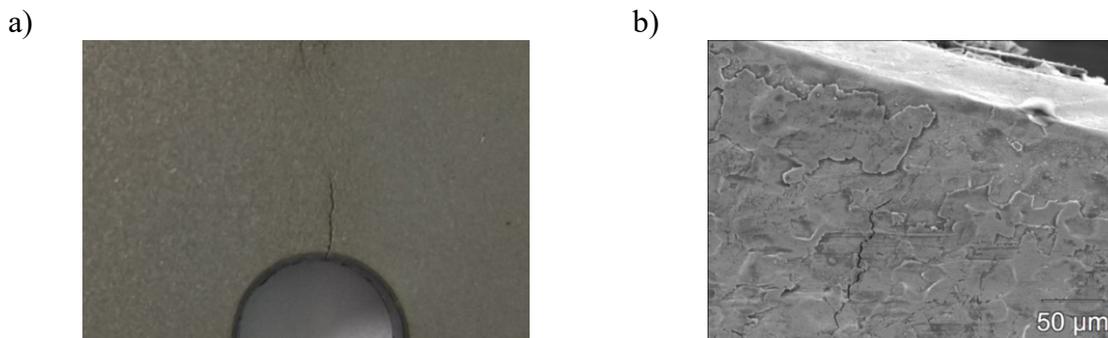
View of steel test piece surfaces – DD11; a) – fatigue fracture – general view, b) – view of microcrack at hole edge
